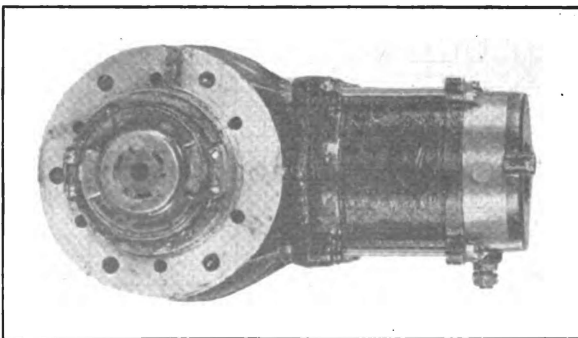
Bijur (rear end) starter, rear view of assembly
